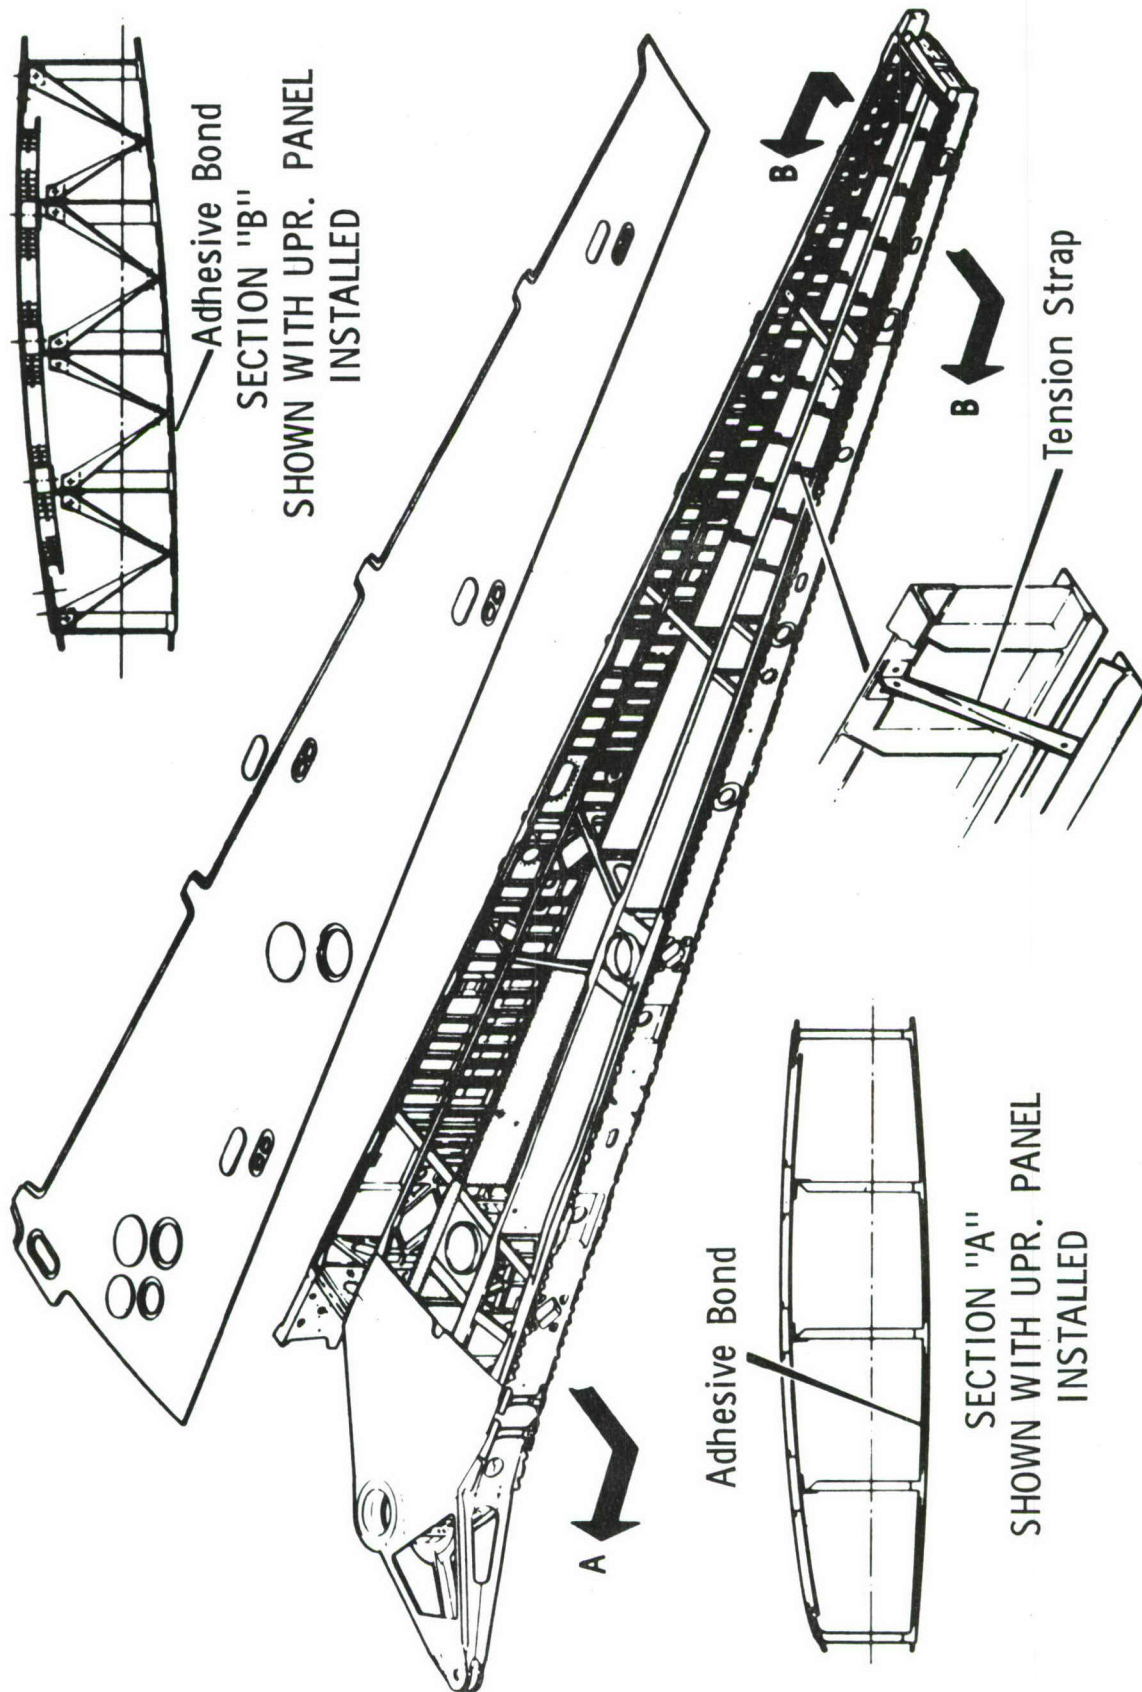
Sandwich Upper Skin, Laminated Lower With Tension Straps Outboard (Sheet 1)
